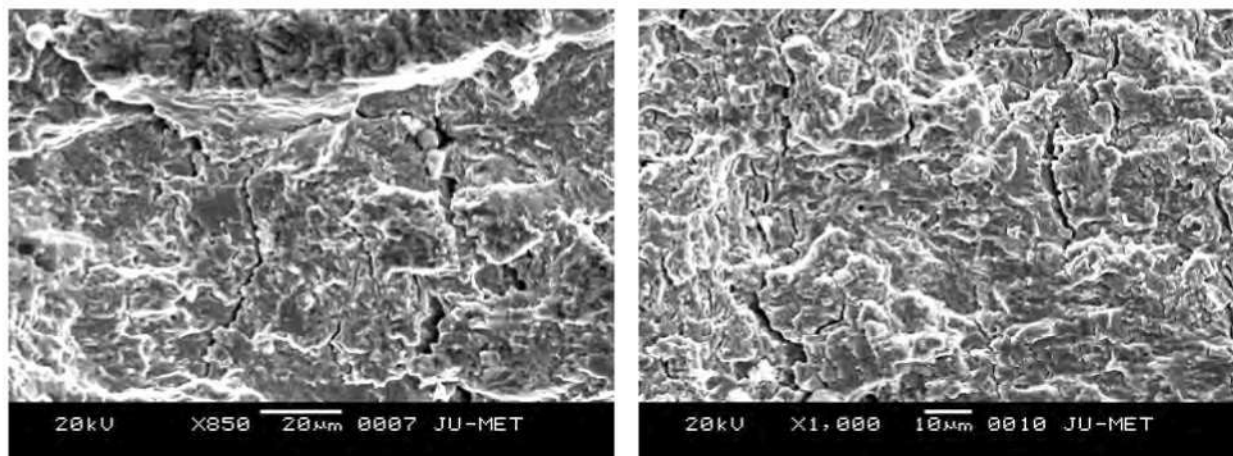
Fatigue Fracture surfaces of Weld Metal
